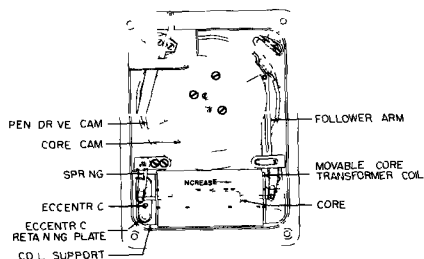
Receiver with Retransmitting Movable Core Transformer
